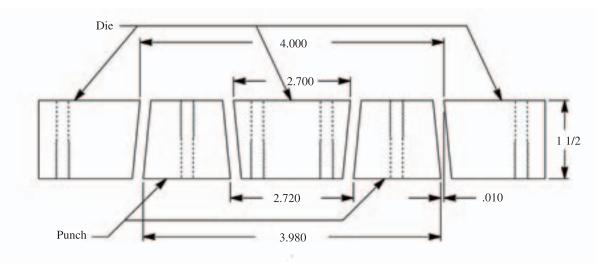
20 Compound Die from One Piece of Tool Steel From one piece of tool steel, a high performance inexpensive compound die can be produced. (Clearance is exaggerated.)
